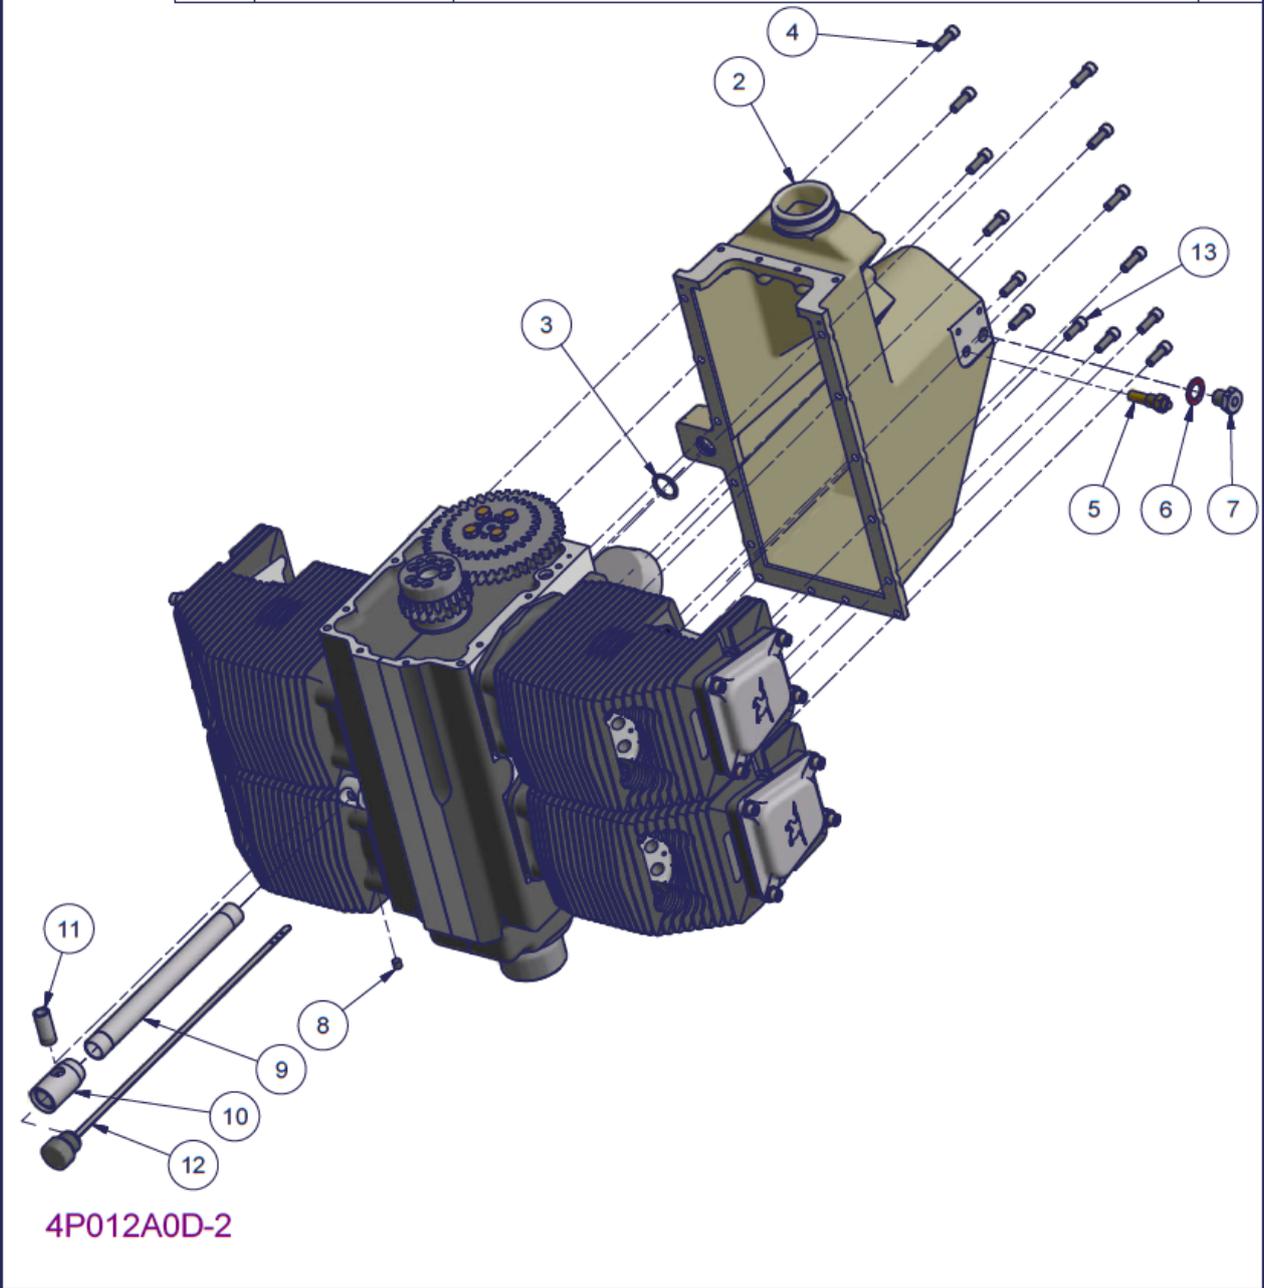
2200 Sump installation (integral plenum) – Parts List
